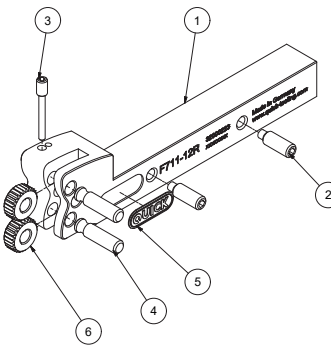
F711-LD exploded drawing (Swiss-type lathe variant)
